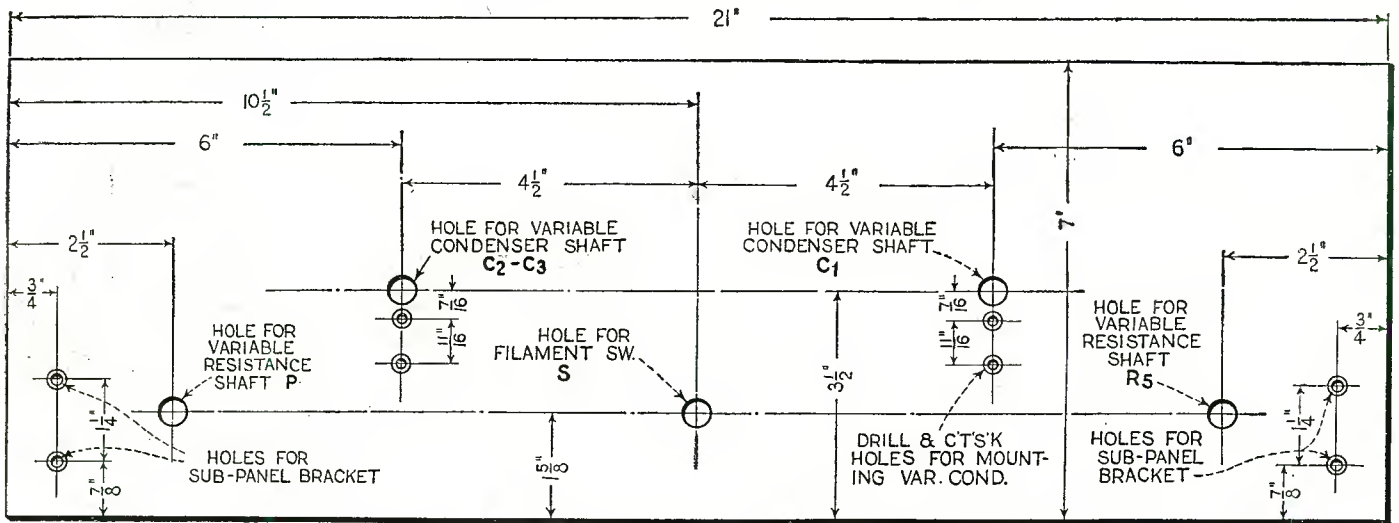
Panel layout giving measurements and dimensions for the drilling of all holes.
